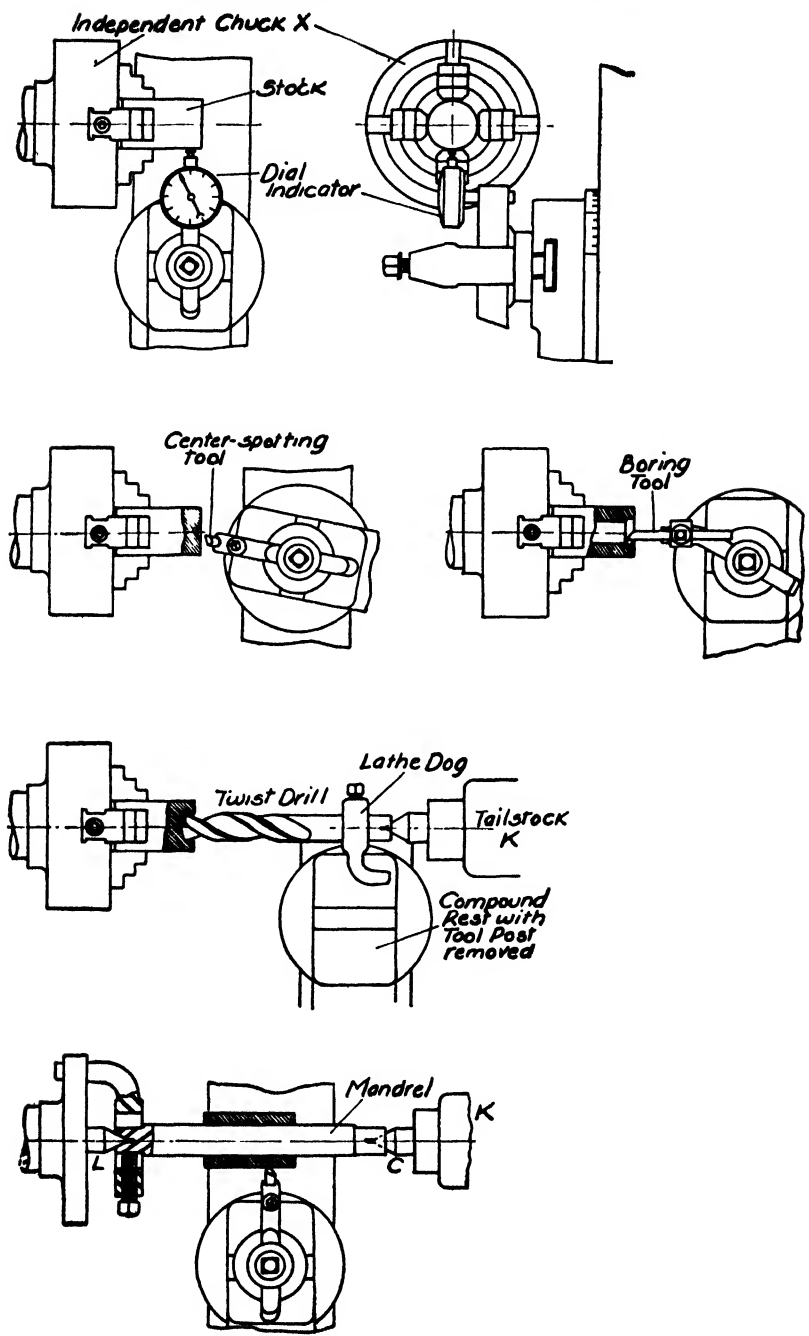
Turning a Bushing in the Engine Lathe.
